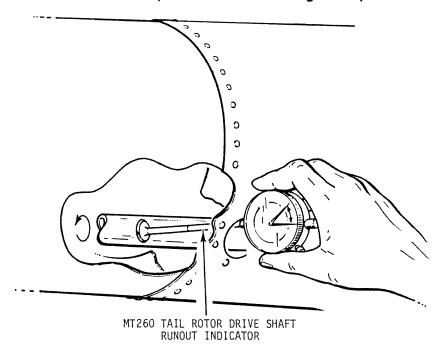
TAIL ROTOR DRIVE SHAFT RUNOUT CHECK
